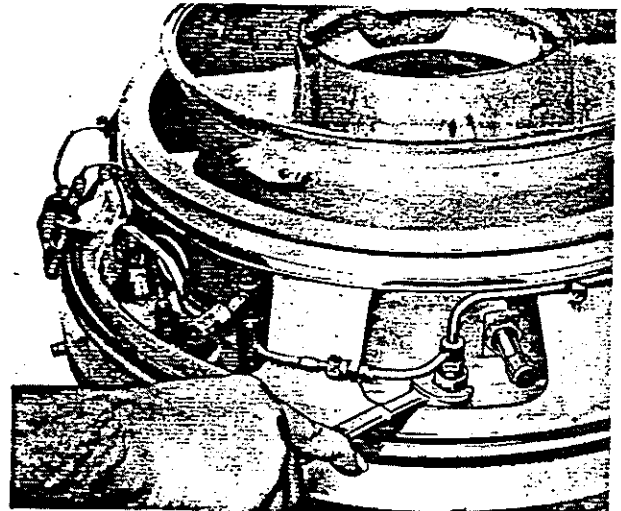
Removing Main Fuel Manifold Fitting Nuts
